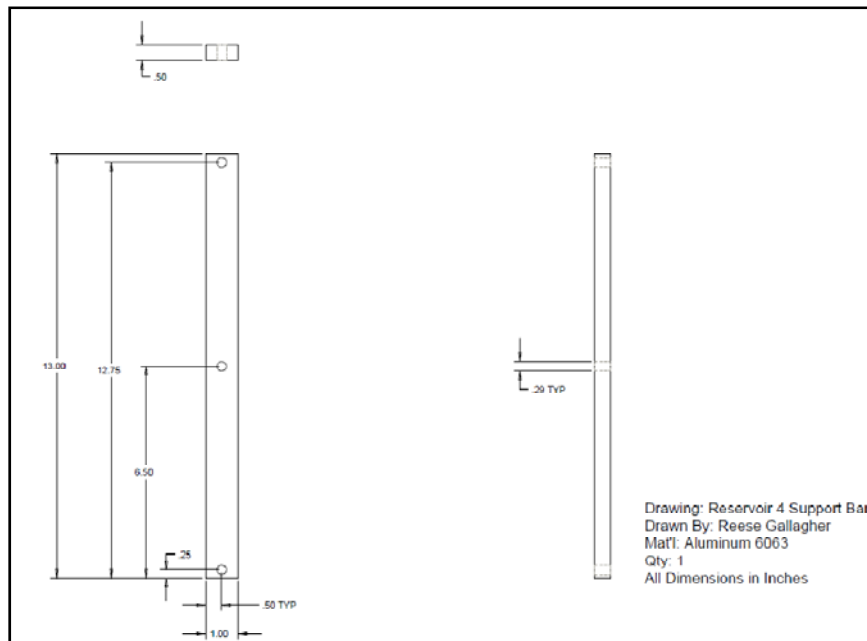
Reservoir 4 Support Bar Dimensional Drawing
